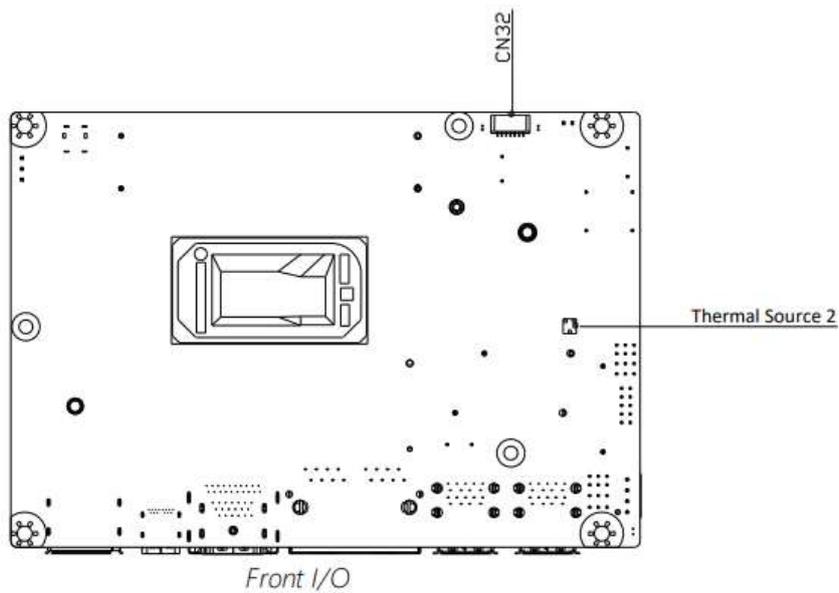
Jumpers and Connectors Location- Board Bottom
